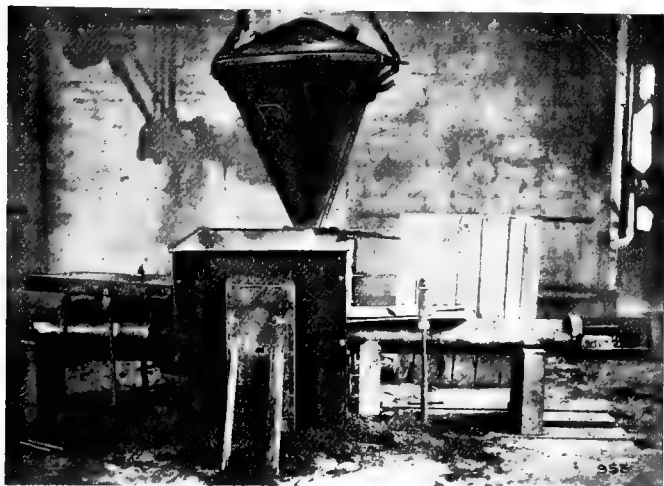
THERMIT CRUCIBLE FOR WELDING.
